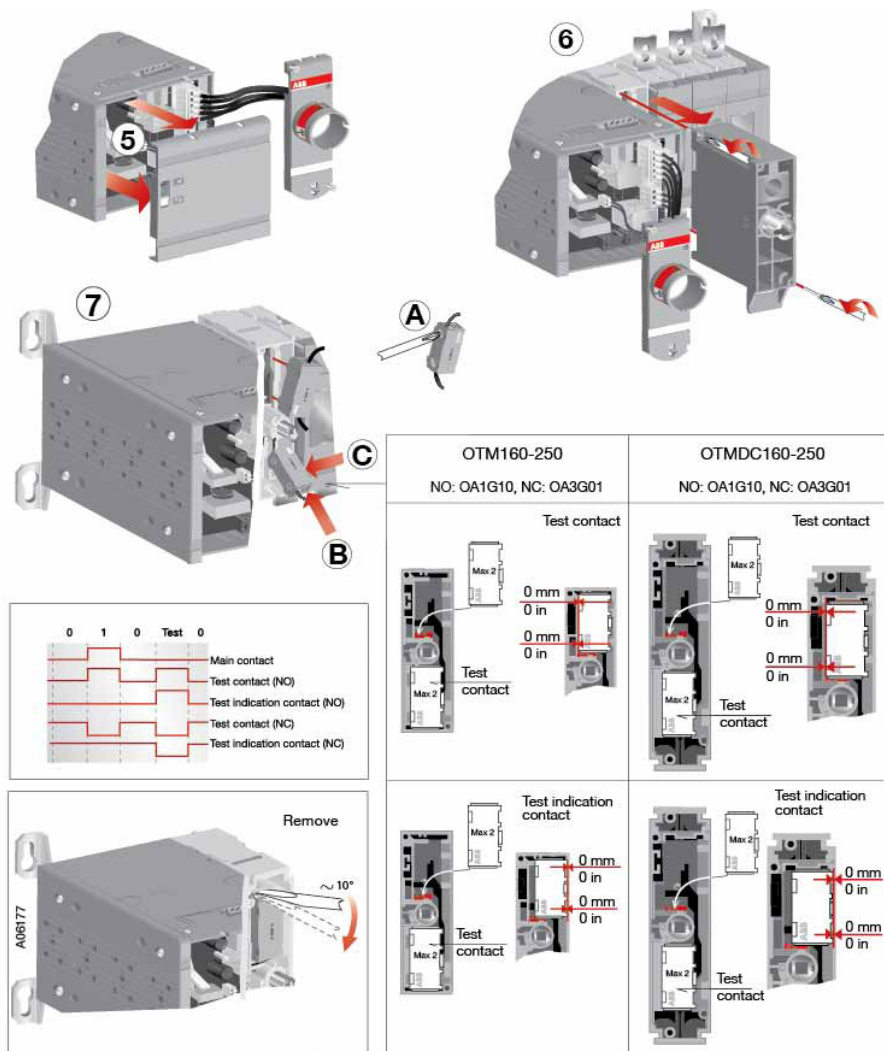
Mounting of the Test auxiliary contacts, type OA_ to the switch mechanism of the motorized switch-disconnectors OTM160-250 and OTMDC100-250
